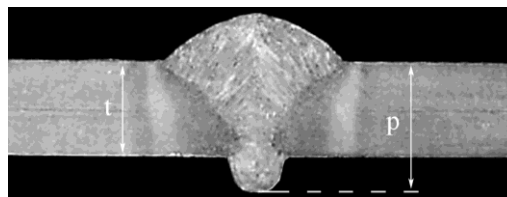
Pierced bead on plate weld specimen (p: penetration depth, t: material thickness)
